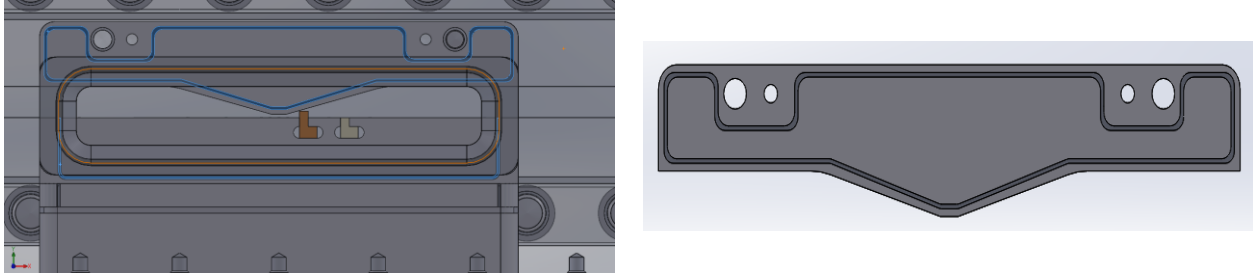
CAD model showing O-ring groove paths machined into the C-D profile and bottom flange on either sides.
